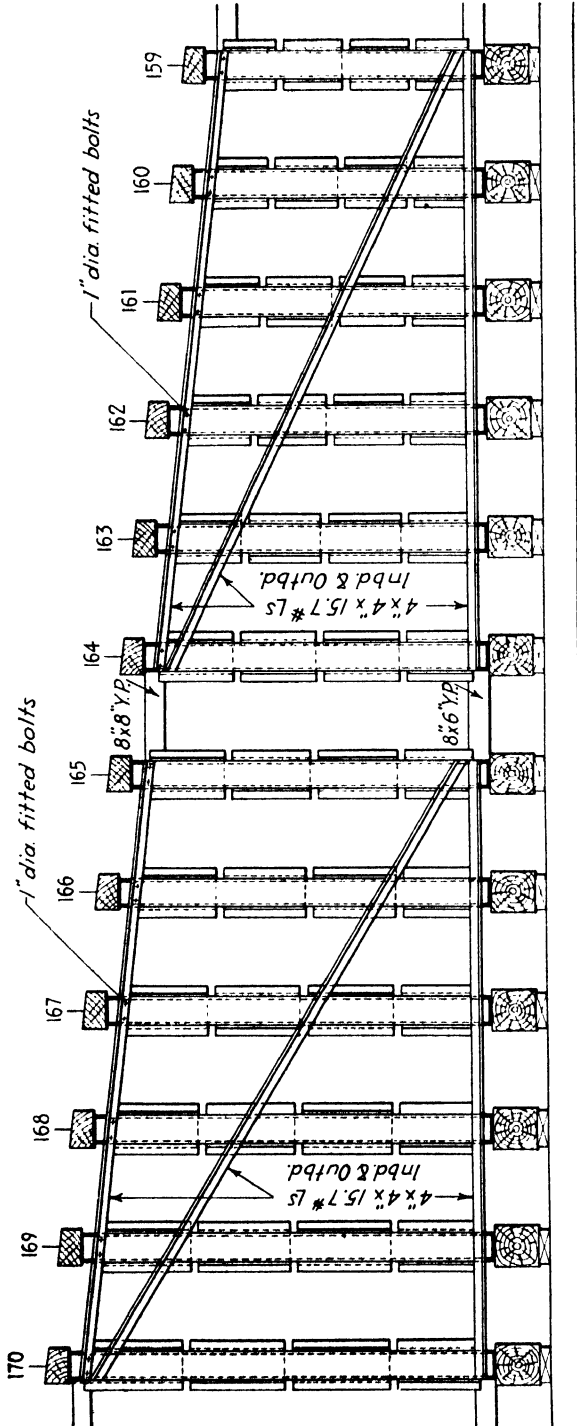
A portion of a launching cradle constructed of structural plate and shapes.
